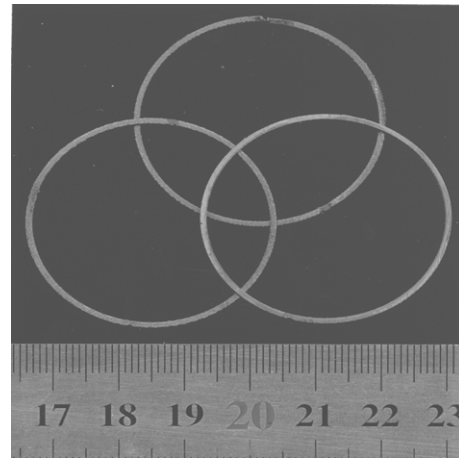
Photograph of metallic glass rings with the thickness of 0.5 mm fabricated by wire electro-discharge machining of the as-cast ring.
